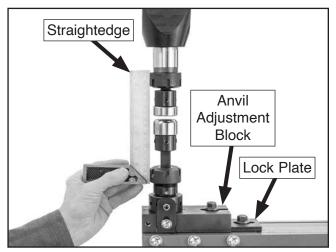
Checking collet alignment with anvil adjustment block flat against lock plate.
